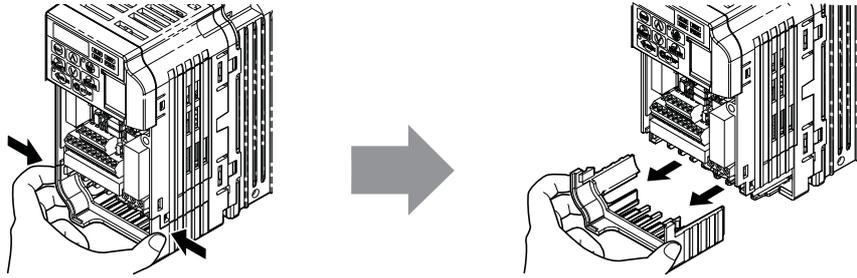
Remove the Bottom Cover on an IP20/Open-Chassis Drive (Models CIMR-V□BA0001B to BA0003B and 2A0001B to 2A0006B)
